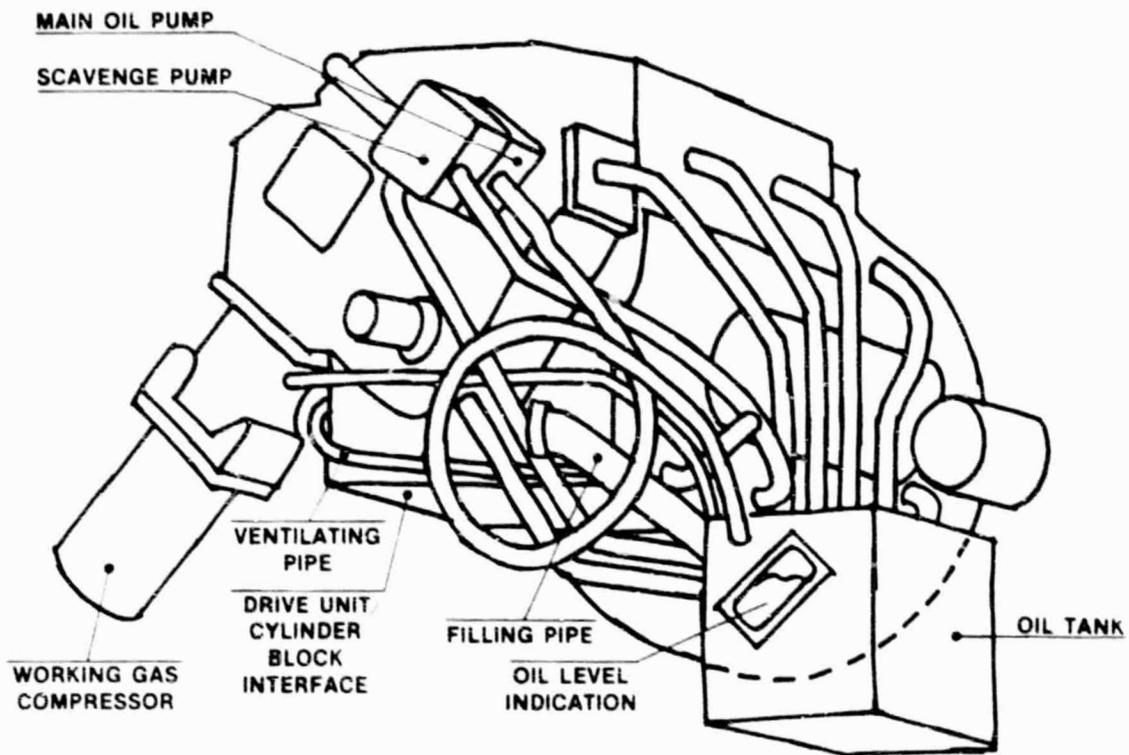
1 Principle Sketch Showing Arrangement of Oil Drainage Pipes.
